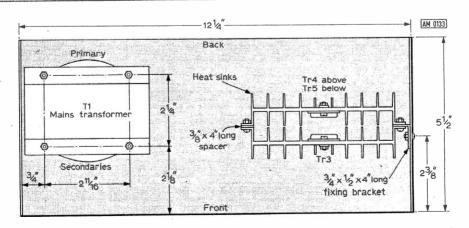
Plan view showing mounting details of mains transformer and power transistor heatsinks.
